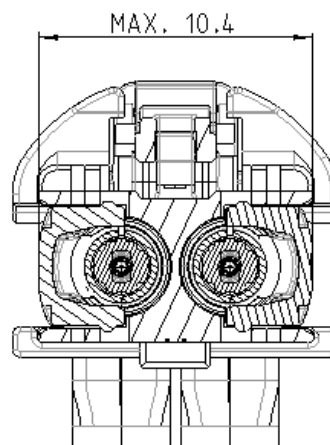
MAXIMUM DIMENSION WHEN TPA IS IN ENDLCK POSITION
